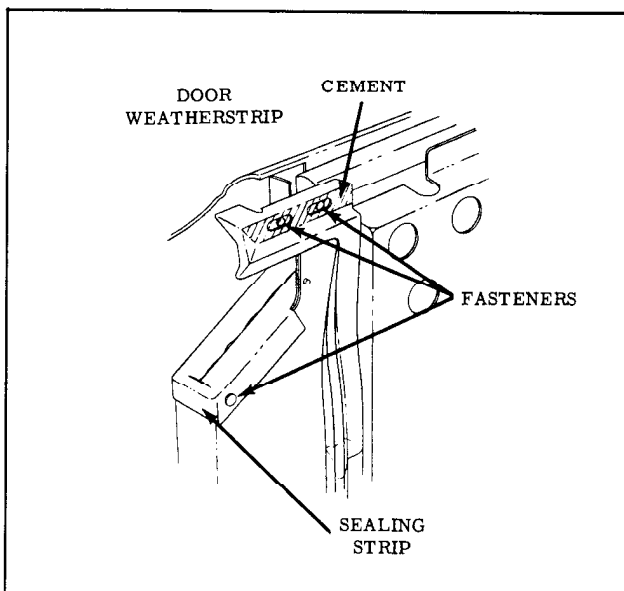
Rear Door Hinge Pillar Sealing Strip (at Belt)
